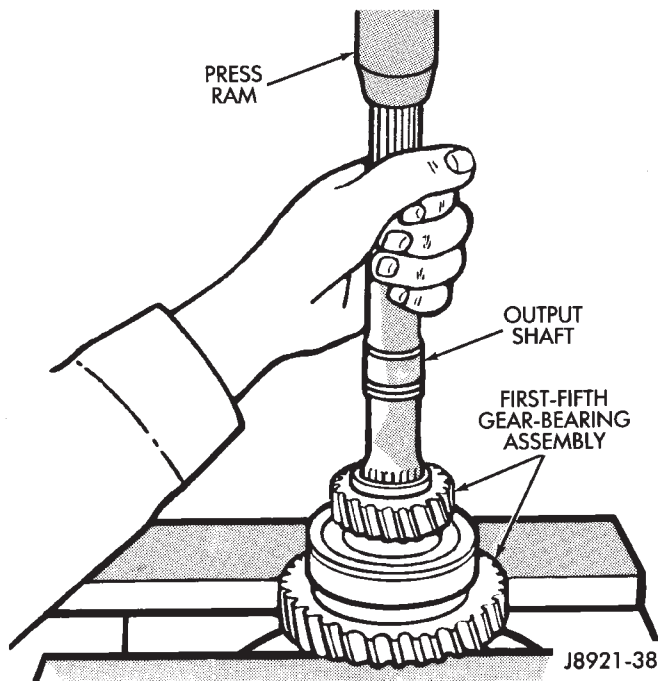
Remove Fifth Gear, First Gear Bearing, And Thrust Washer
